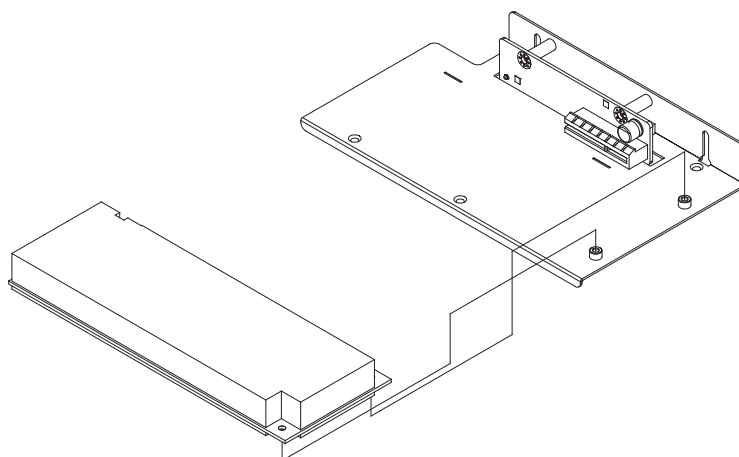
IR Module Assembly-2/IR 模块安装 -2/IR 模組安裝 -2
